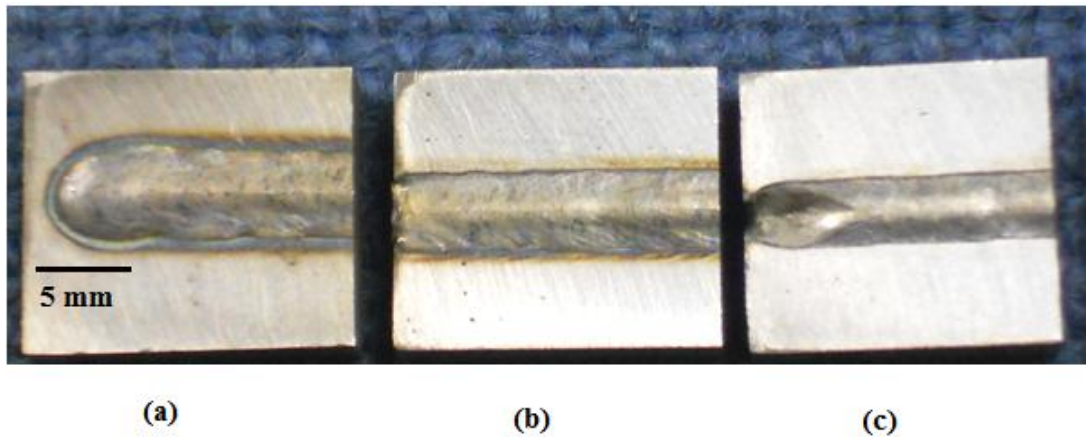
Surface of weld beads produced using 2.5 kW laser power with speeds (a) 0.5 m/min (b) 0.7 m/min (c) 1 m/min
